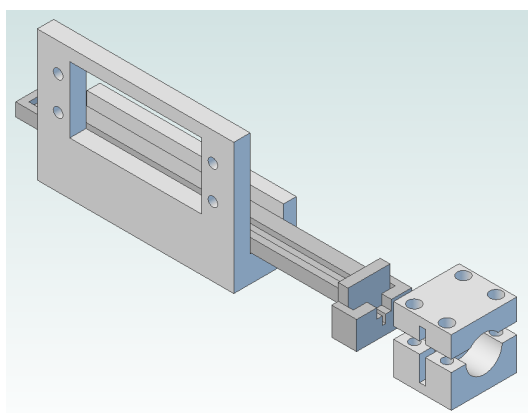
Drawing of the 3D printed syringe pump components. A servo motor actuates the slide attached to the syringe piston while the syringe body is clamped in place.
